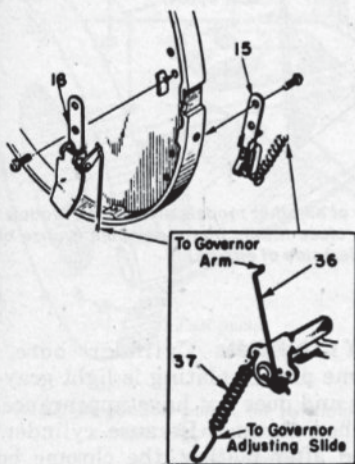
Model 775D governor spring (37) is connected to adjustable slide (15) making it possible to adjust engine governed speed by turning adjusting screw on slide. Refer to Fig. HL215; spring is hooked in throttle arm hole numbered (1) and governor rod is hooked in hole numbered (2).
